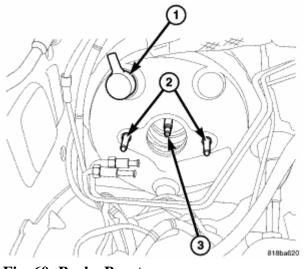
Brake Booster Courtesy of CHRYSLER LLC
